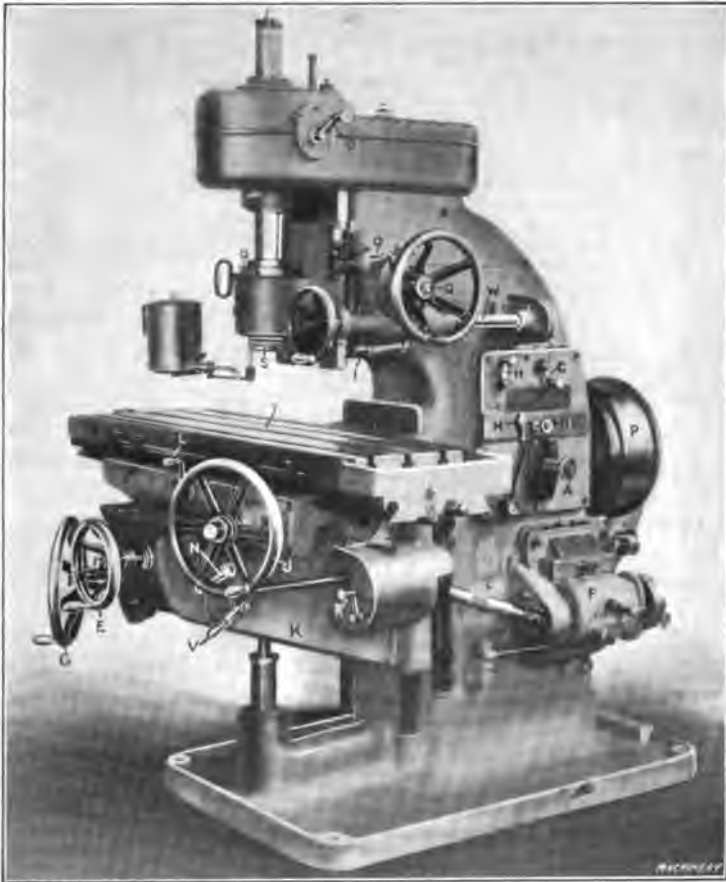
Brown & Sharpe Vertical-spindle Milling Machine
